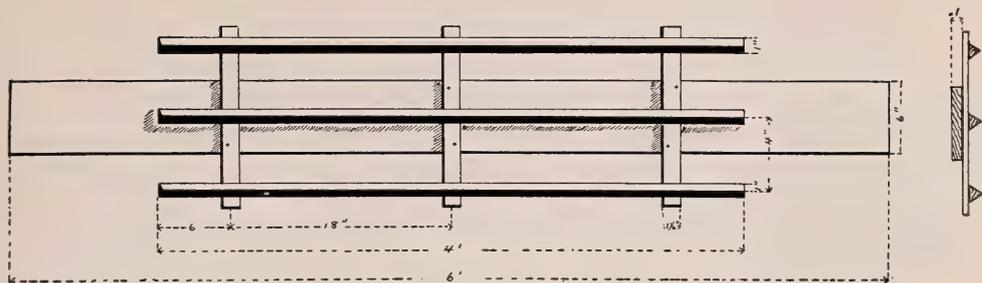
View of marker for making drill in which to sow evergreen seeds.
